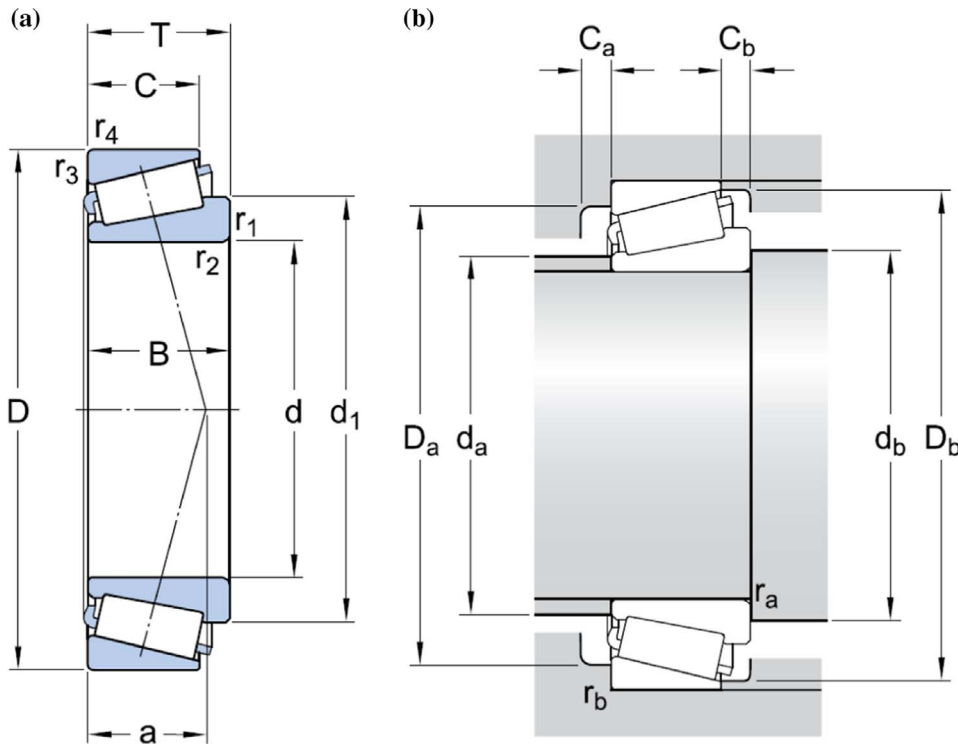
32222-J2-SKF tapered roller single row bearings [42]; (a) geometry and dimension, (b) mounting dimensions.
